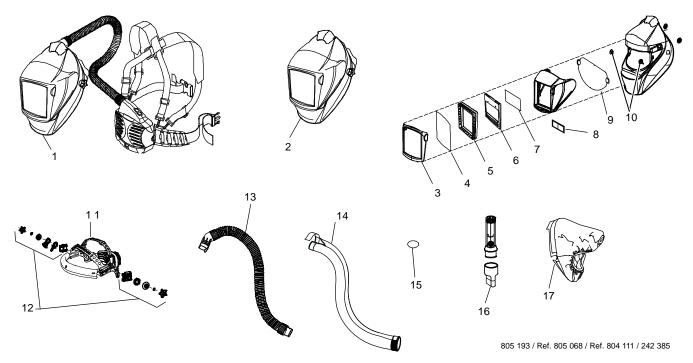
Powered Air Purifying Respirator (PAPR)
